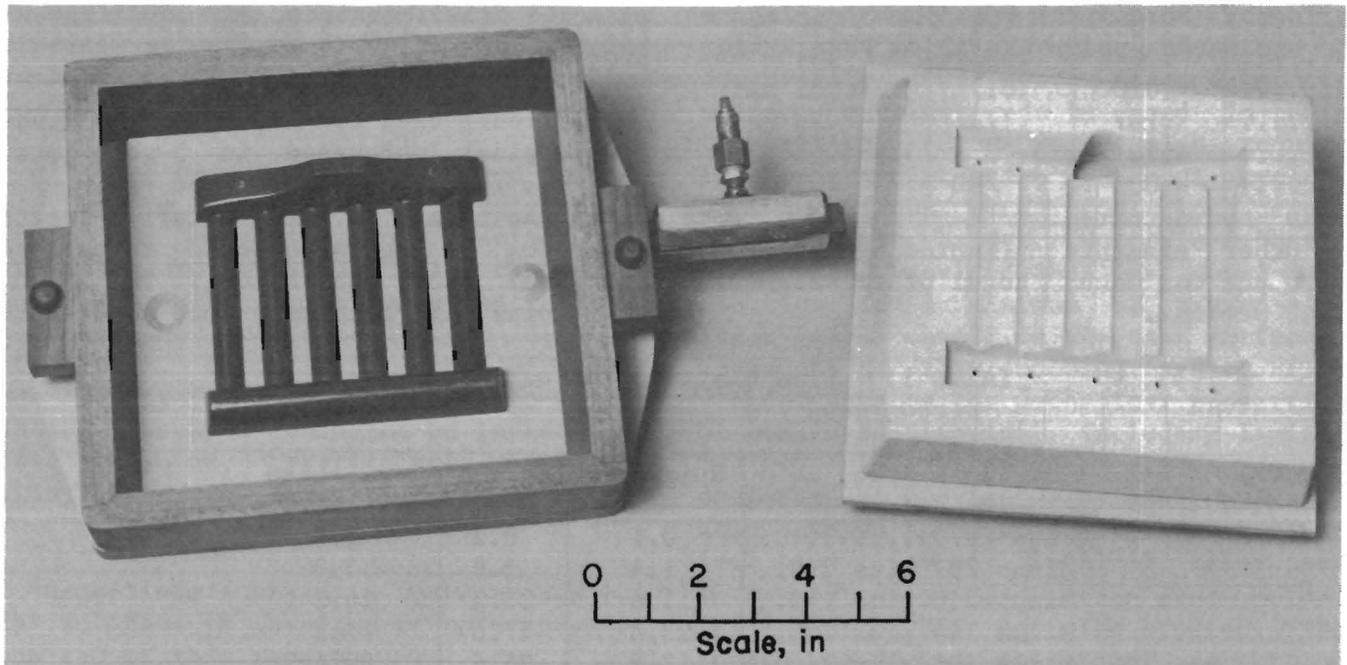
Wood pattern used for hand ramming and a cured cope section of the mold.
